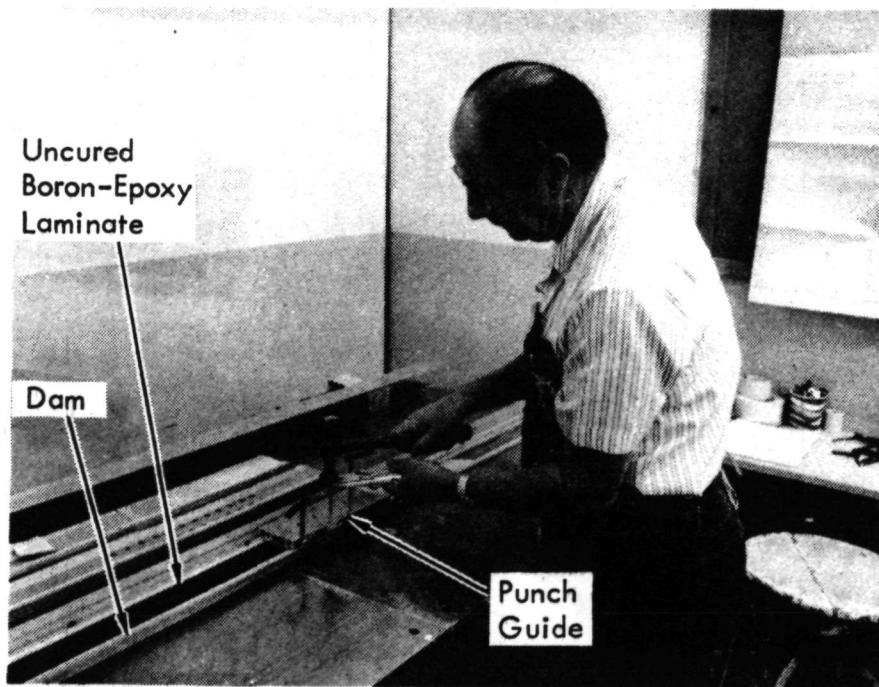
PUNCHING FASTENER HOLES IN LAMINATE LAYUP
